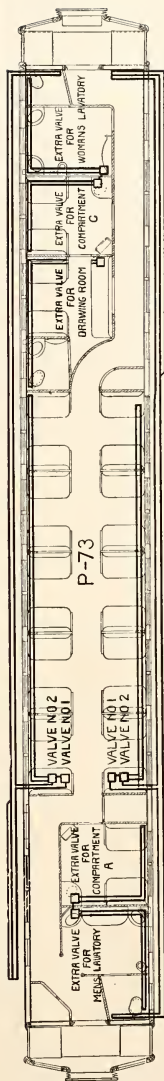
Typical arrangement of heating coils and cut-out valves in a standard sleeping car.
